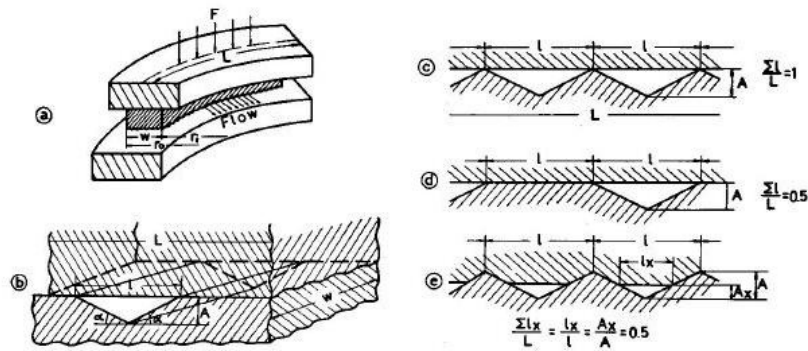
Dimension of the seal: (a) The interface contact annulus; (b) a typical leak path ; (c) the surface contact (machined surface); (d) single paths on the surface; (e) loaded interface contact (Roth, 1972)
